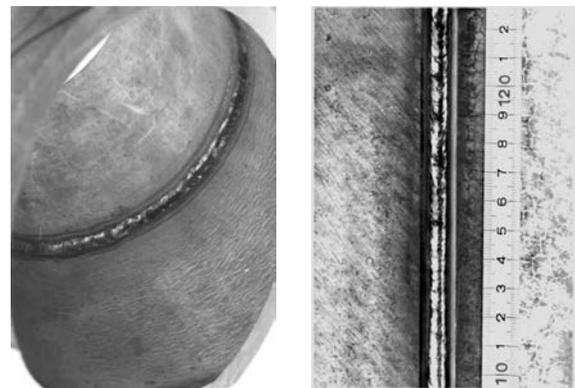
Glossy, regular bead appearance of the reverse (left) and face (right) surfaces of the root pass weld made by GTAW with a TG-X308L filler rod on a Type 304 pipe joint without back shielding.
